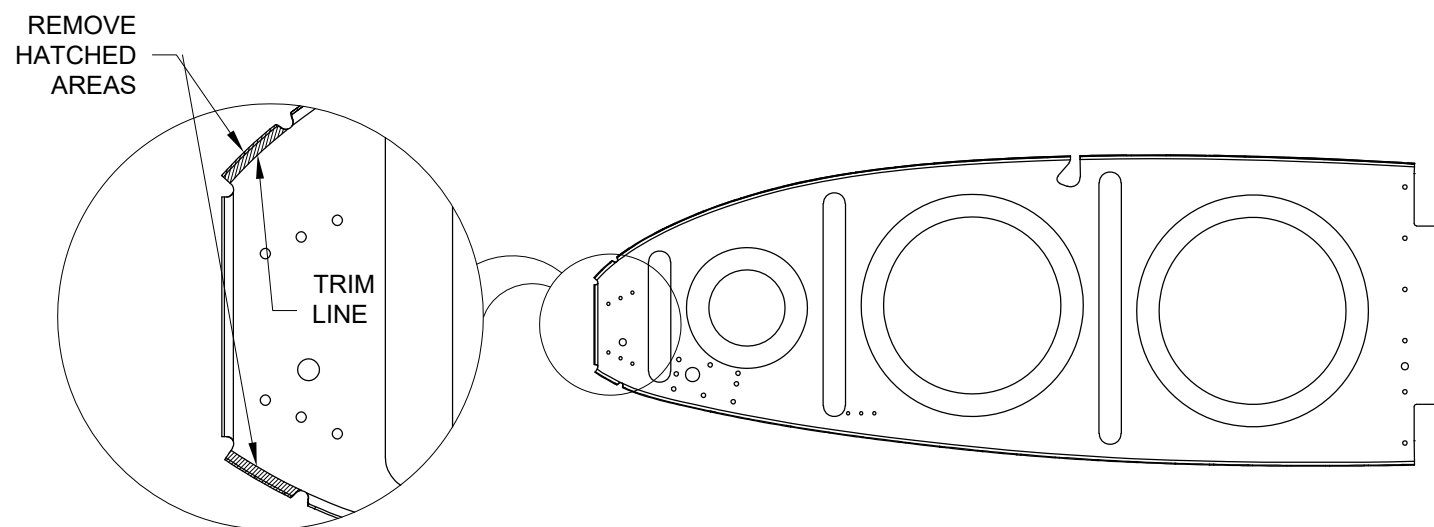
W-1208-1 NOSE RIB FWD FLANGE TRIM
